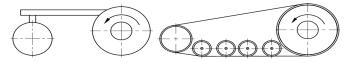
Scheme of a wheel-track mover with an enlarged drive wheel
